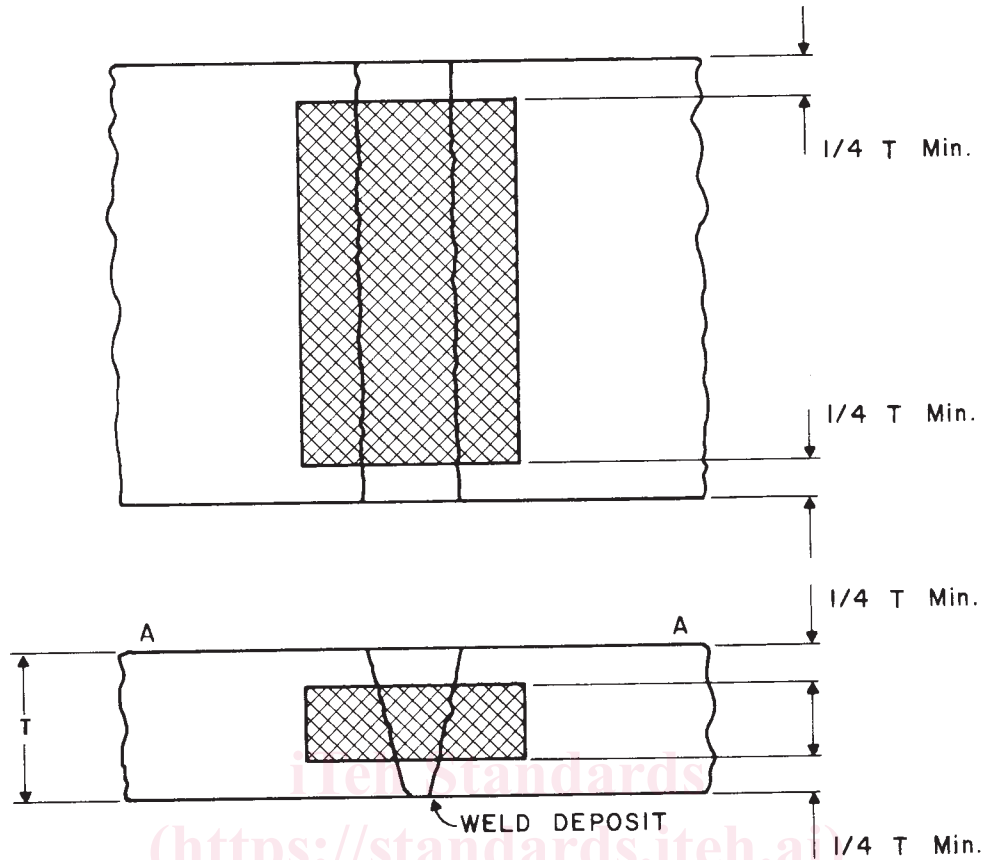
Charpy V-Notch Specimen Must Be Within Cross-Hatched Zone With Notch in the Weld Metal Perpendicular to Surface A-A
